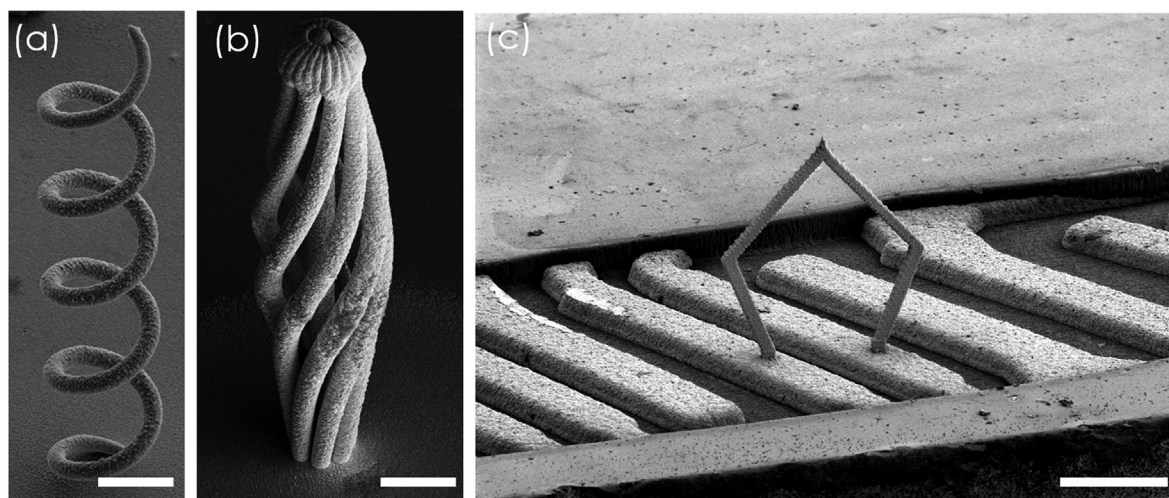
(a) A gold helix printed on a gold substrate. Scale bar, 10 μm . (b) A microplug printed in gold. Design courtesy of Axon Cables, SA. Scale bar, 20 μm . (c) A gold, pentagon-shaped connector printed on a PCB between two gold pads. Scale bar, 100 μm .
